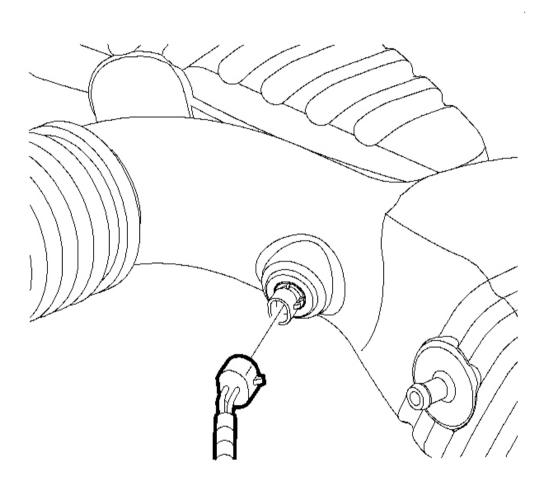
View Of Throttle Body Assembly Courtesy of GENERAL MOTORS CORP.
